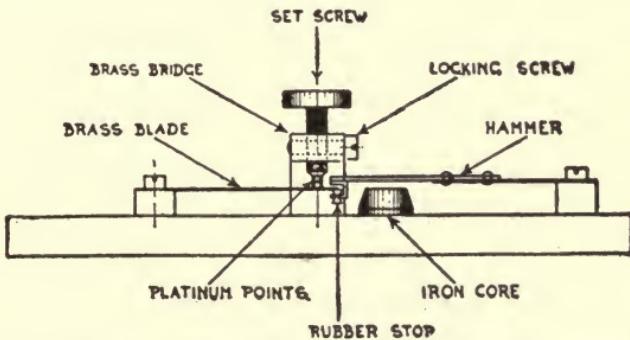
THE TREMBLER OF THE LODGE IGNITION COIL.
